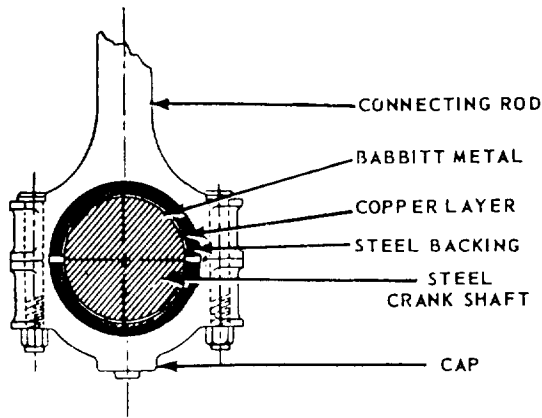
Babbitt-lined bearing in which steel shaft revolves.
